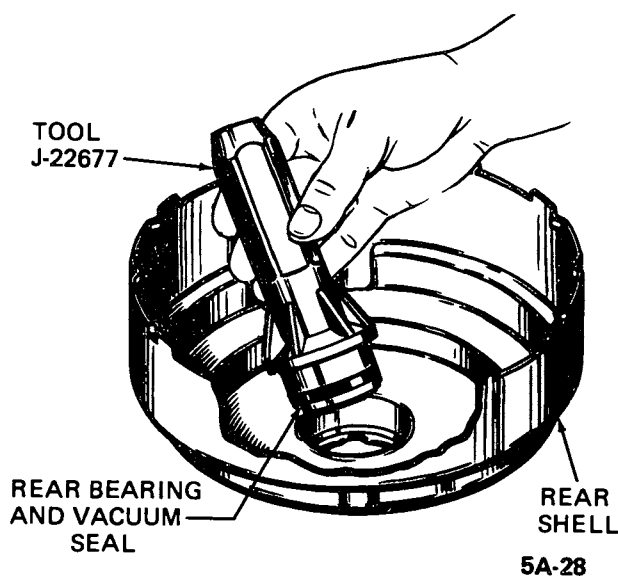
A-28 Installing Rear Bearing and Vacuum Seal
